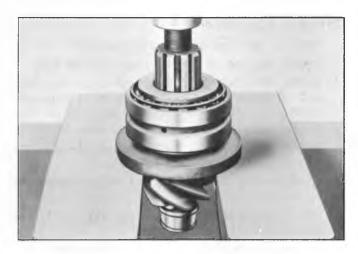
F-- Drive Pinion Front Bearing Removal-5200, 7200 lb.
